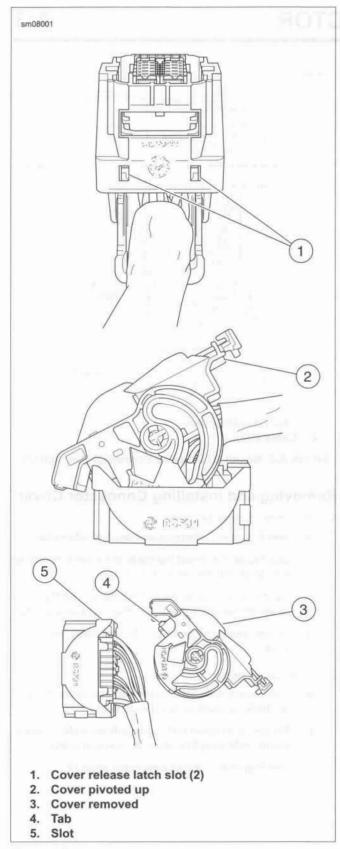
Removing Bosch BTC Sealed Connector Cover
